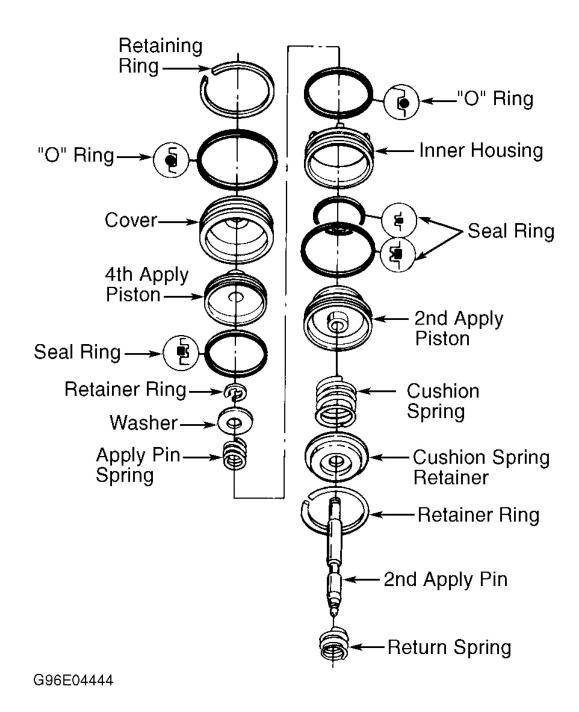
Exploded View Of 2-4 Servo Assembly Courtesy of GENERAL MOTORS CORP.
